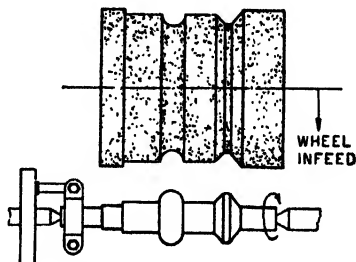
Form grinding. (*The Socony-Vacuum Oil Company*)
